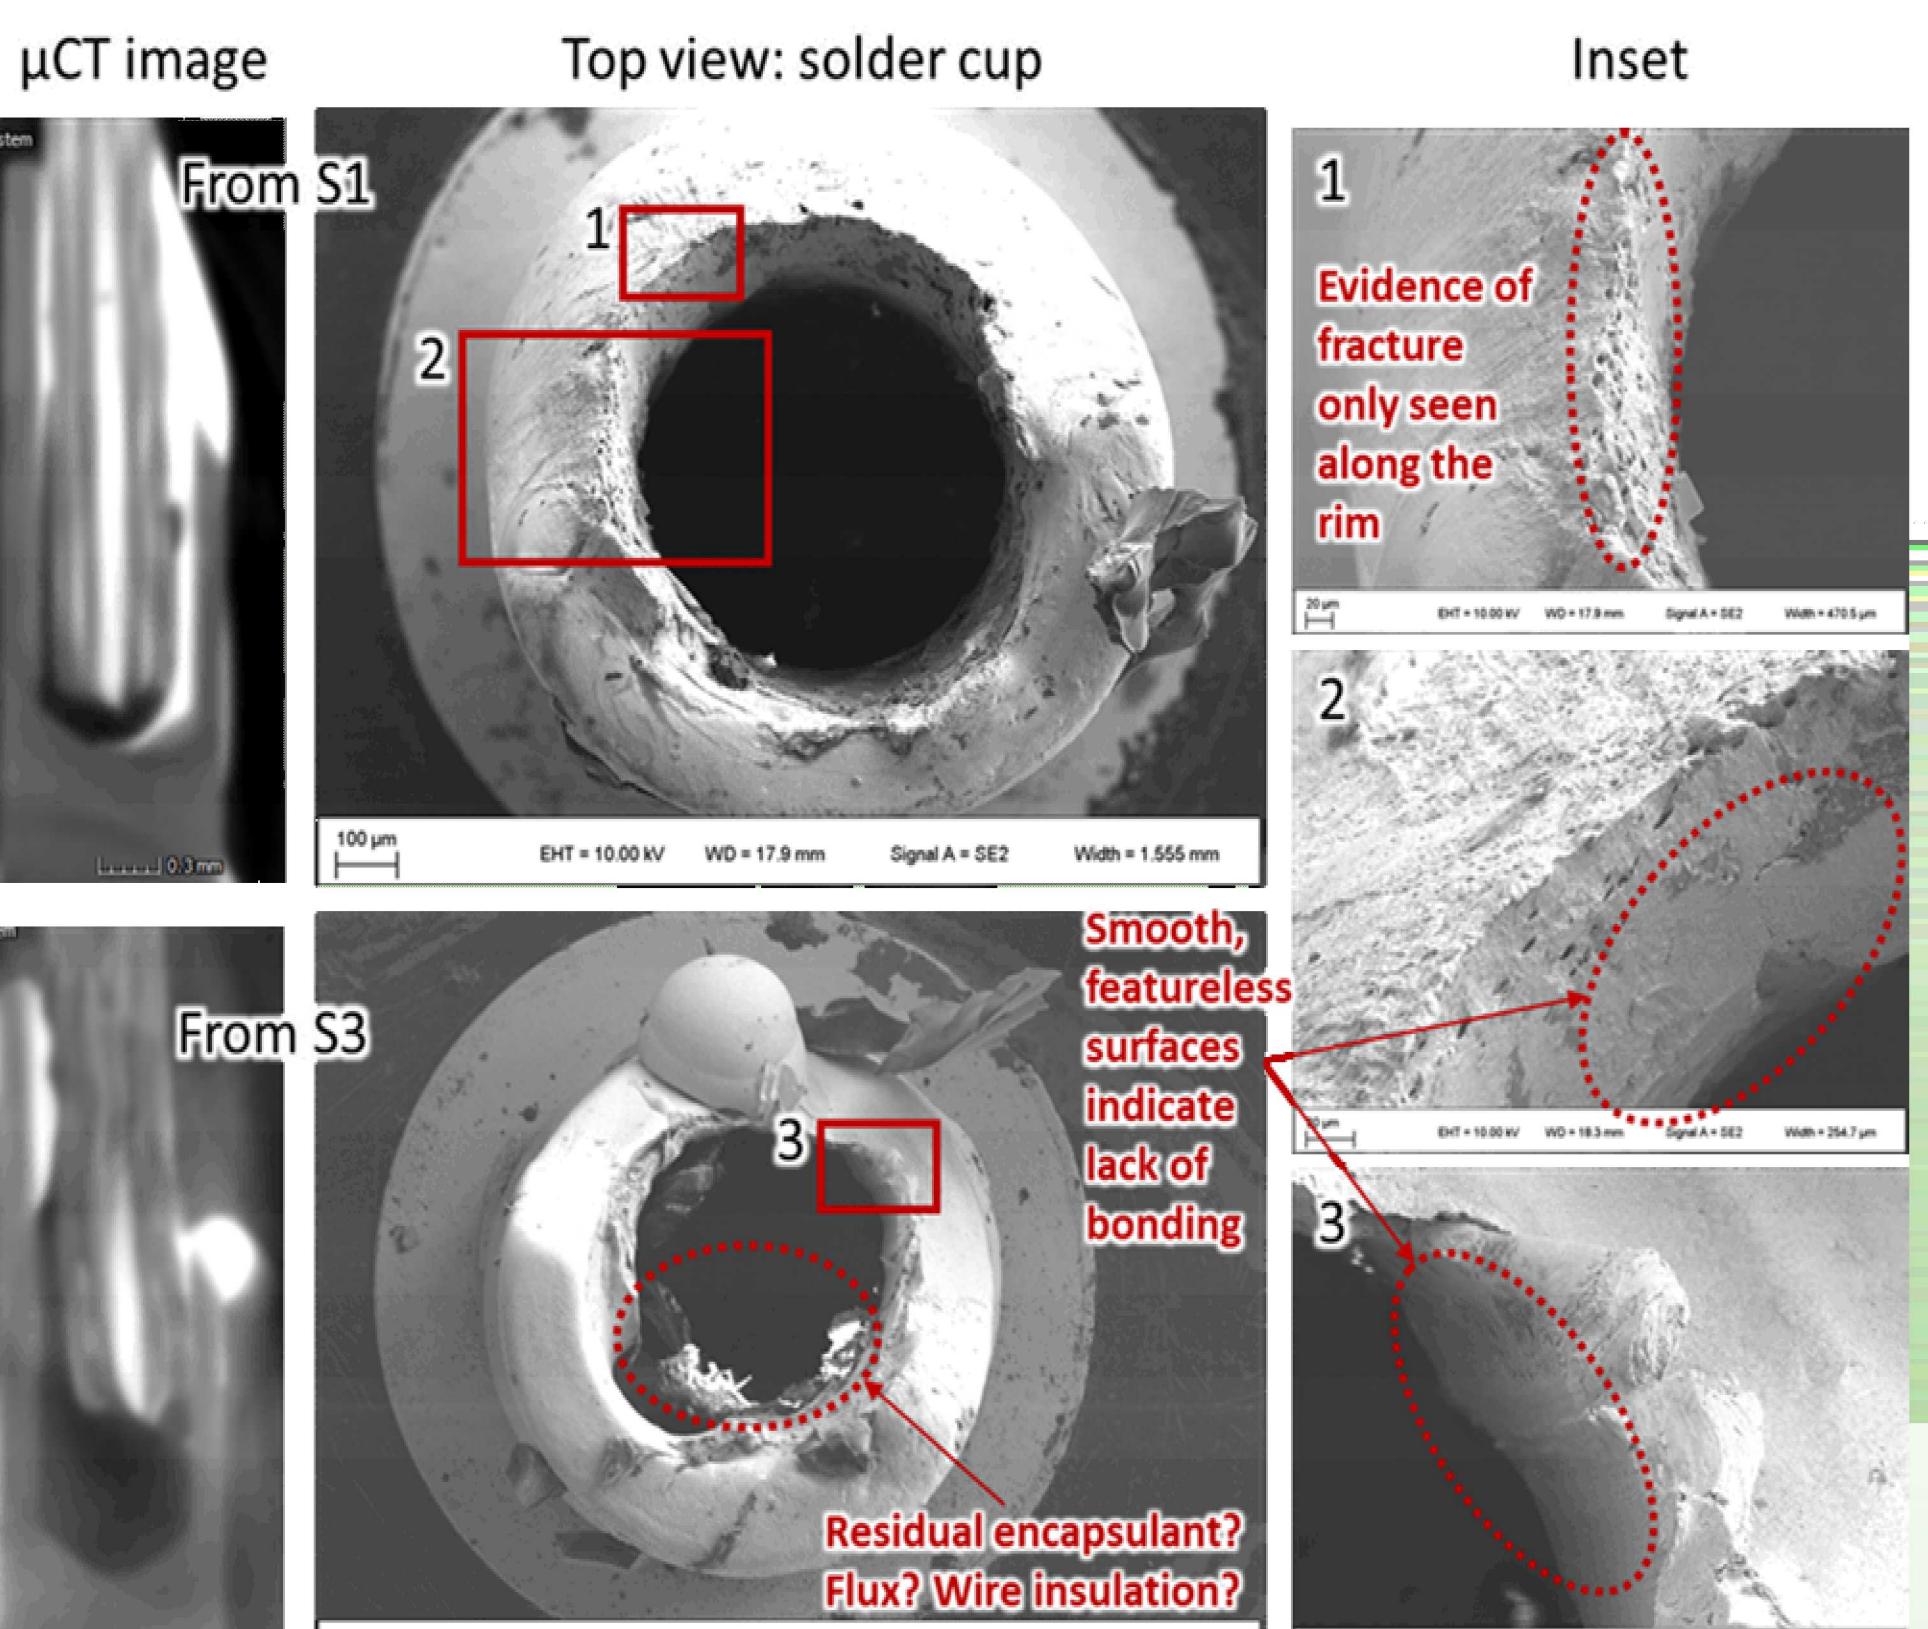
SEM images of solder joint failures with high wire insertion levels. Side view μ CT scans are shown to the left of the corresponding solder cup top views, and insets are shown on the right.
